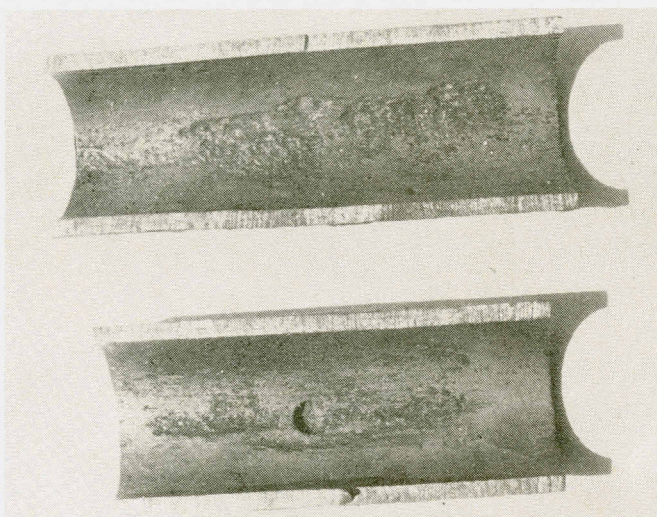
Failure of Boiler Tubes on account of caustic gouging.
